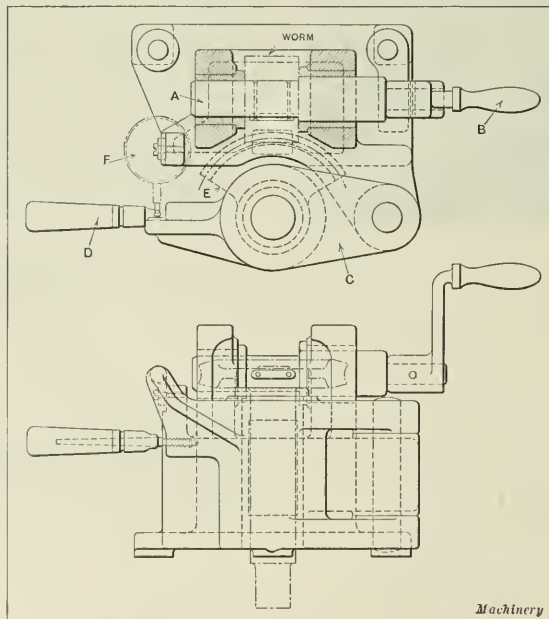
Fixture for testing Center Distance of Steering Gear Sector and Worm
